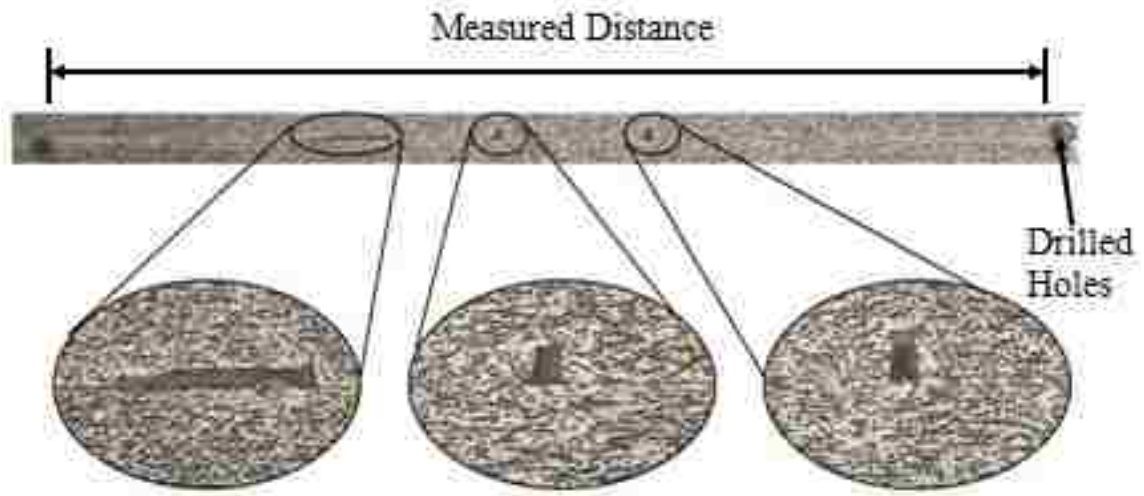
Montage of weld with voids that have not healed from welding (Micrographs of welding condition A)
